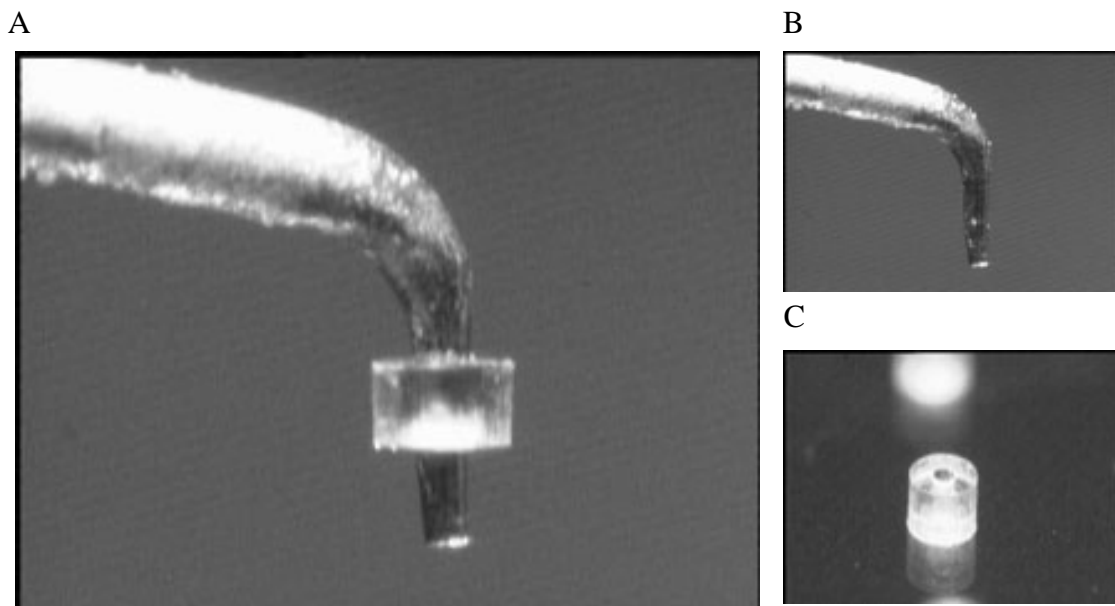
(A) Fished probe gripper. (B) Etched tungsten rod. (C) Pushing shoulder.
